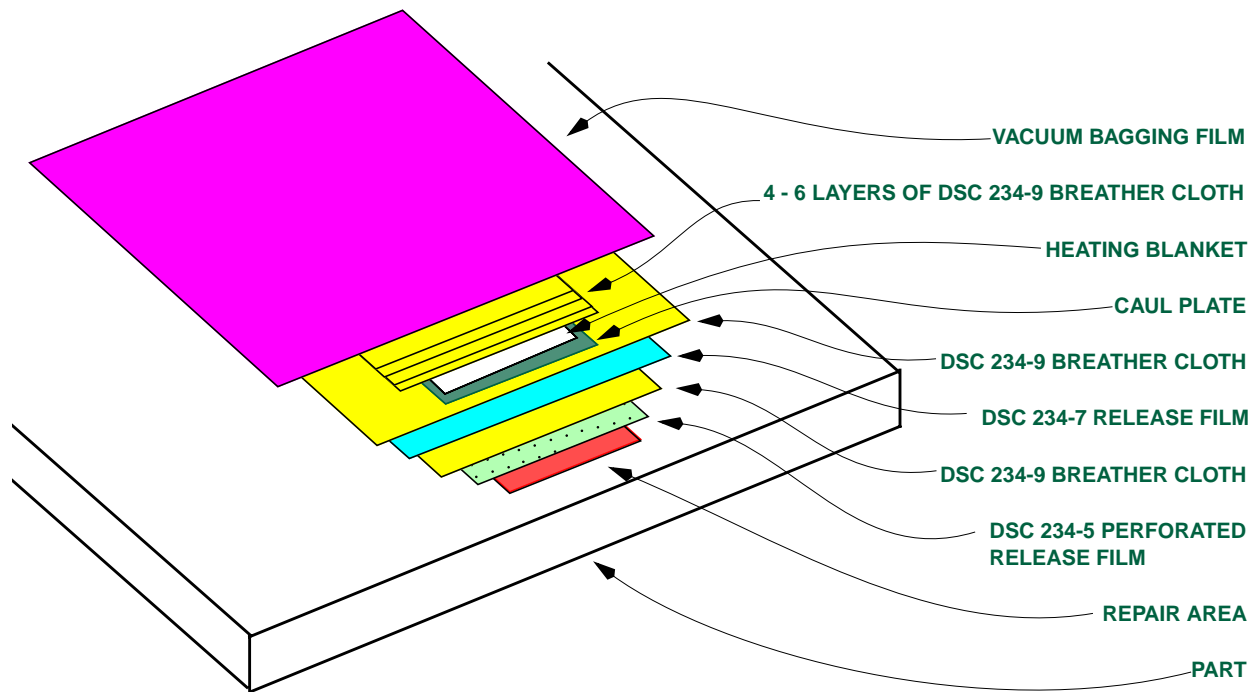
VACUUM BAGGING FOR HEAT BLANKET CURING
